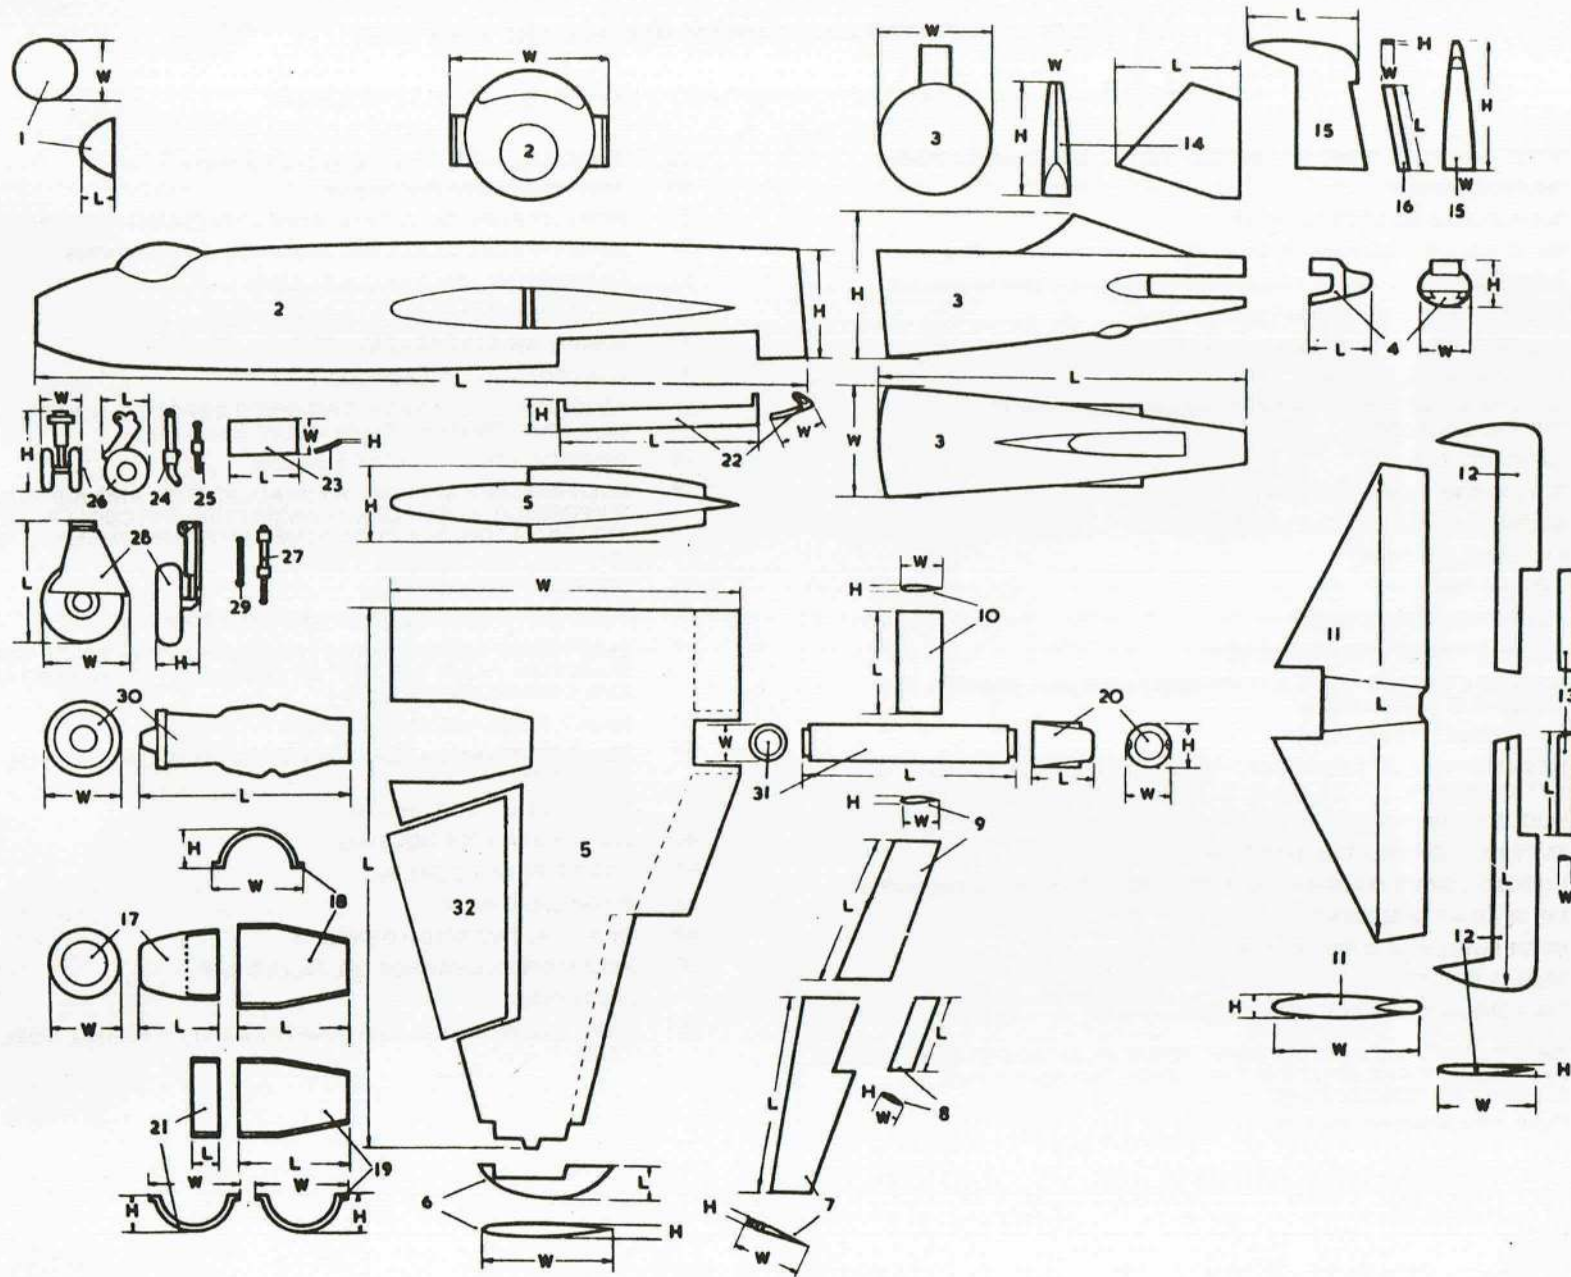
COMPONENT WEIGHTS AND DIMENSIONS
